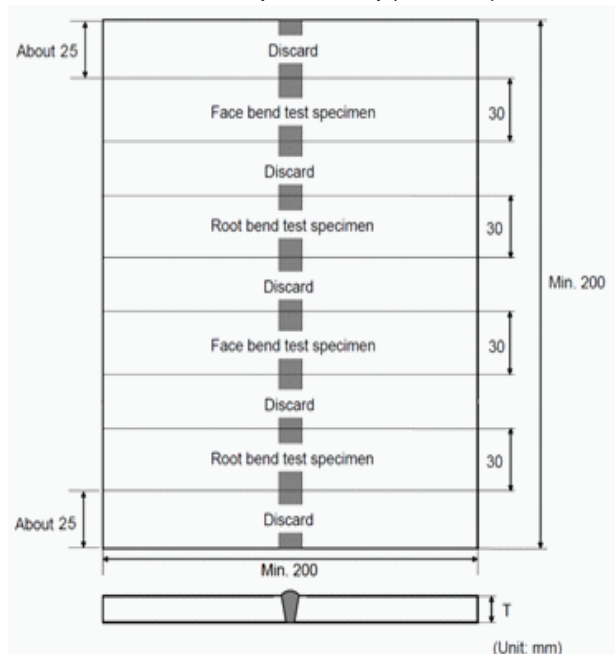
Dimensions and types of test assembly for butt welds ($T \geq 12\text{mm}$) (1/1/2018)
